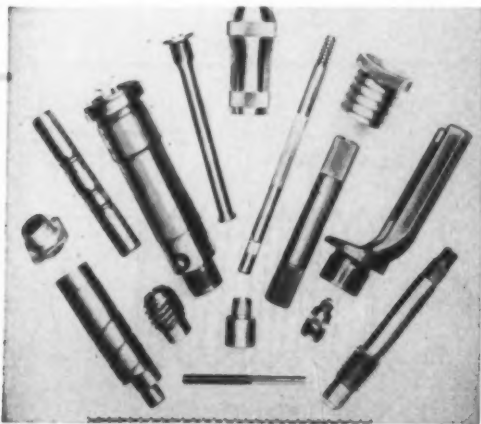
Component parts with precision threads, serrations, grooves and burnished surfaces
